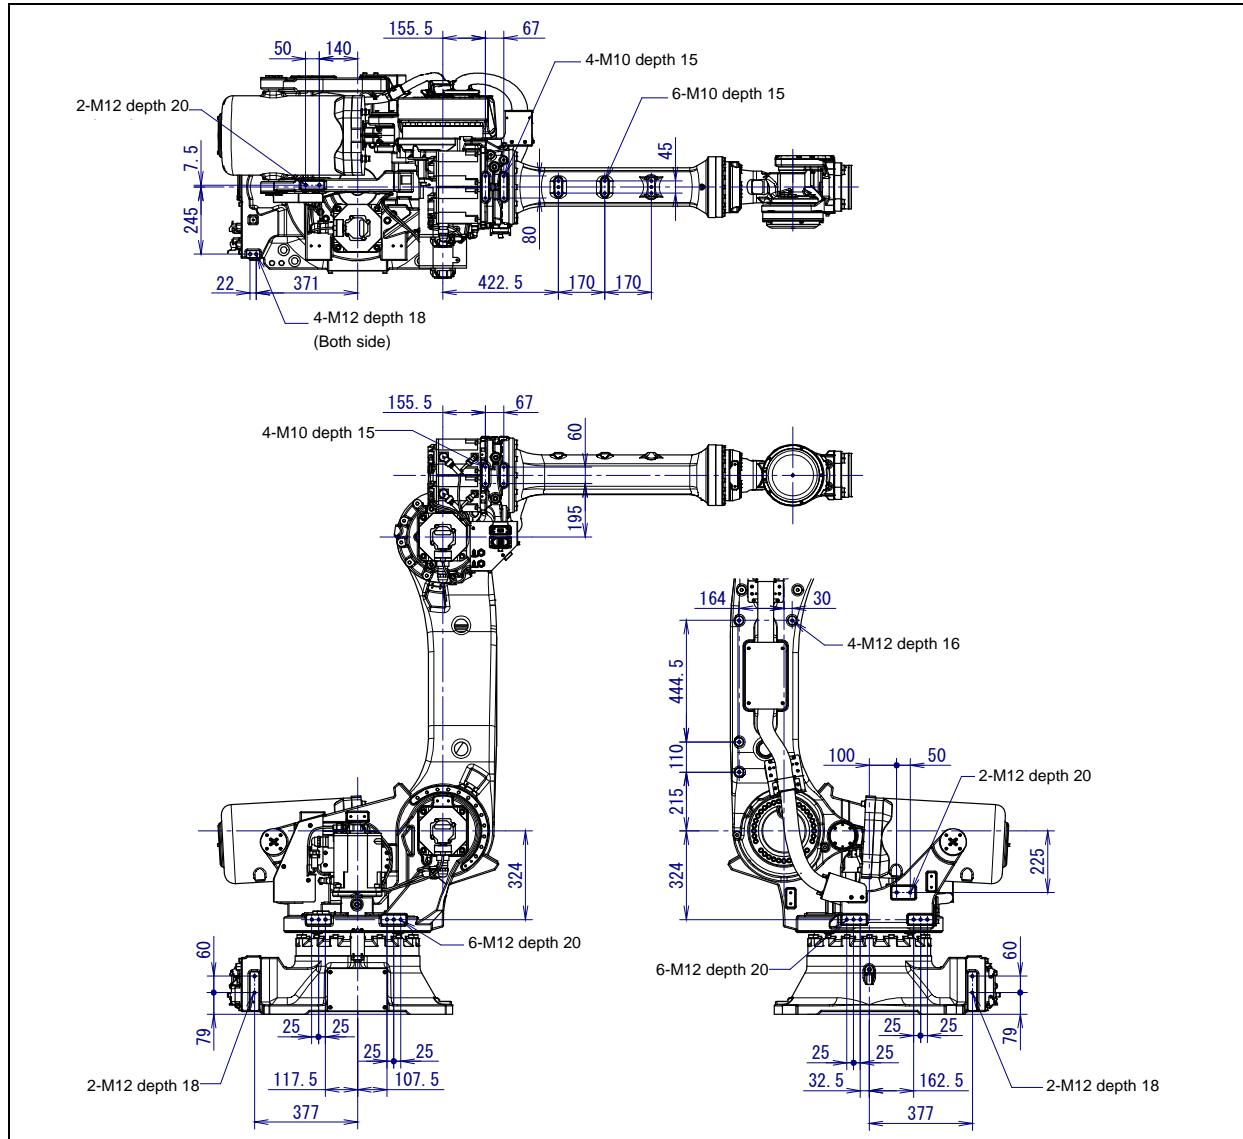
(a) Equipment mounting faces (R-2000iC/165F/210F)
